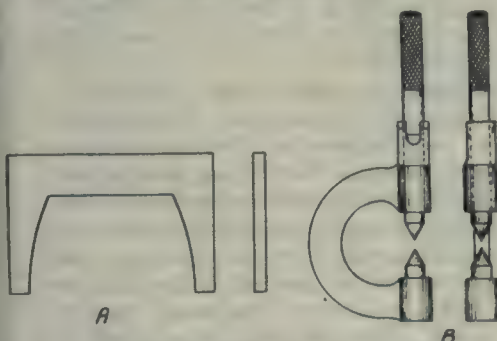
GAUGES USED TO TEST SHELL AFTER FINISHING INSIDE OF NOSE.
